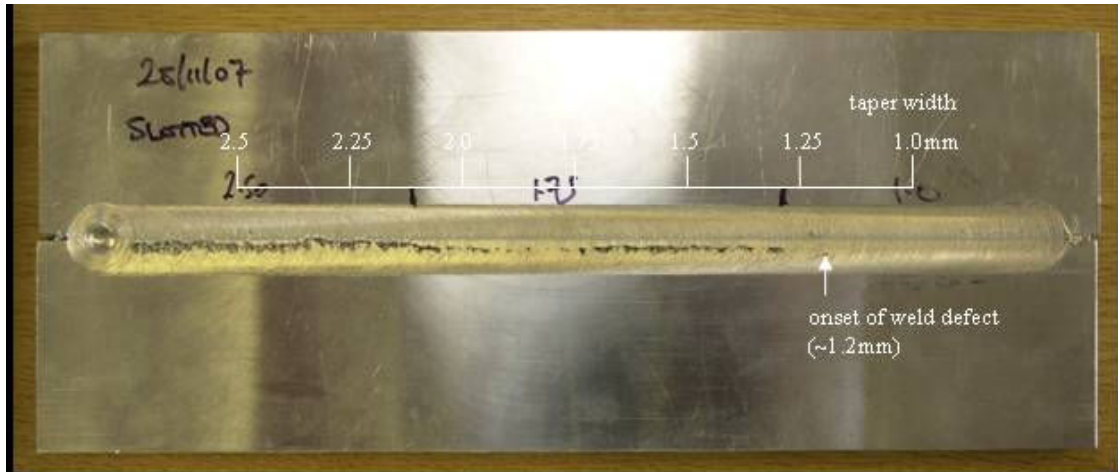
Tapered crack repair indicating onset of weld defect
